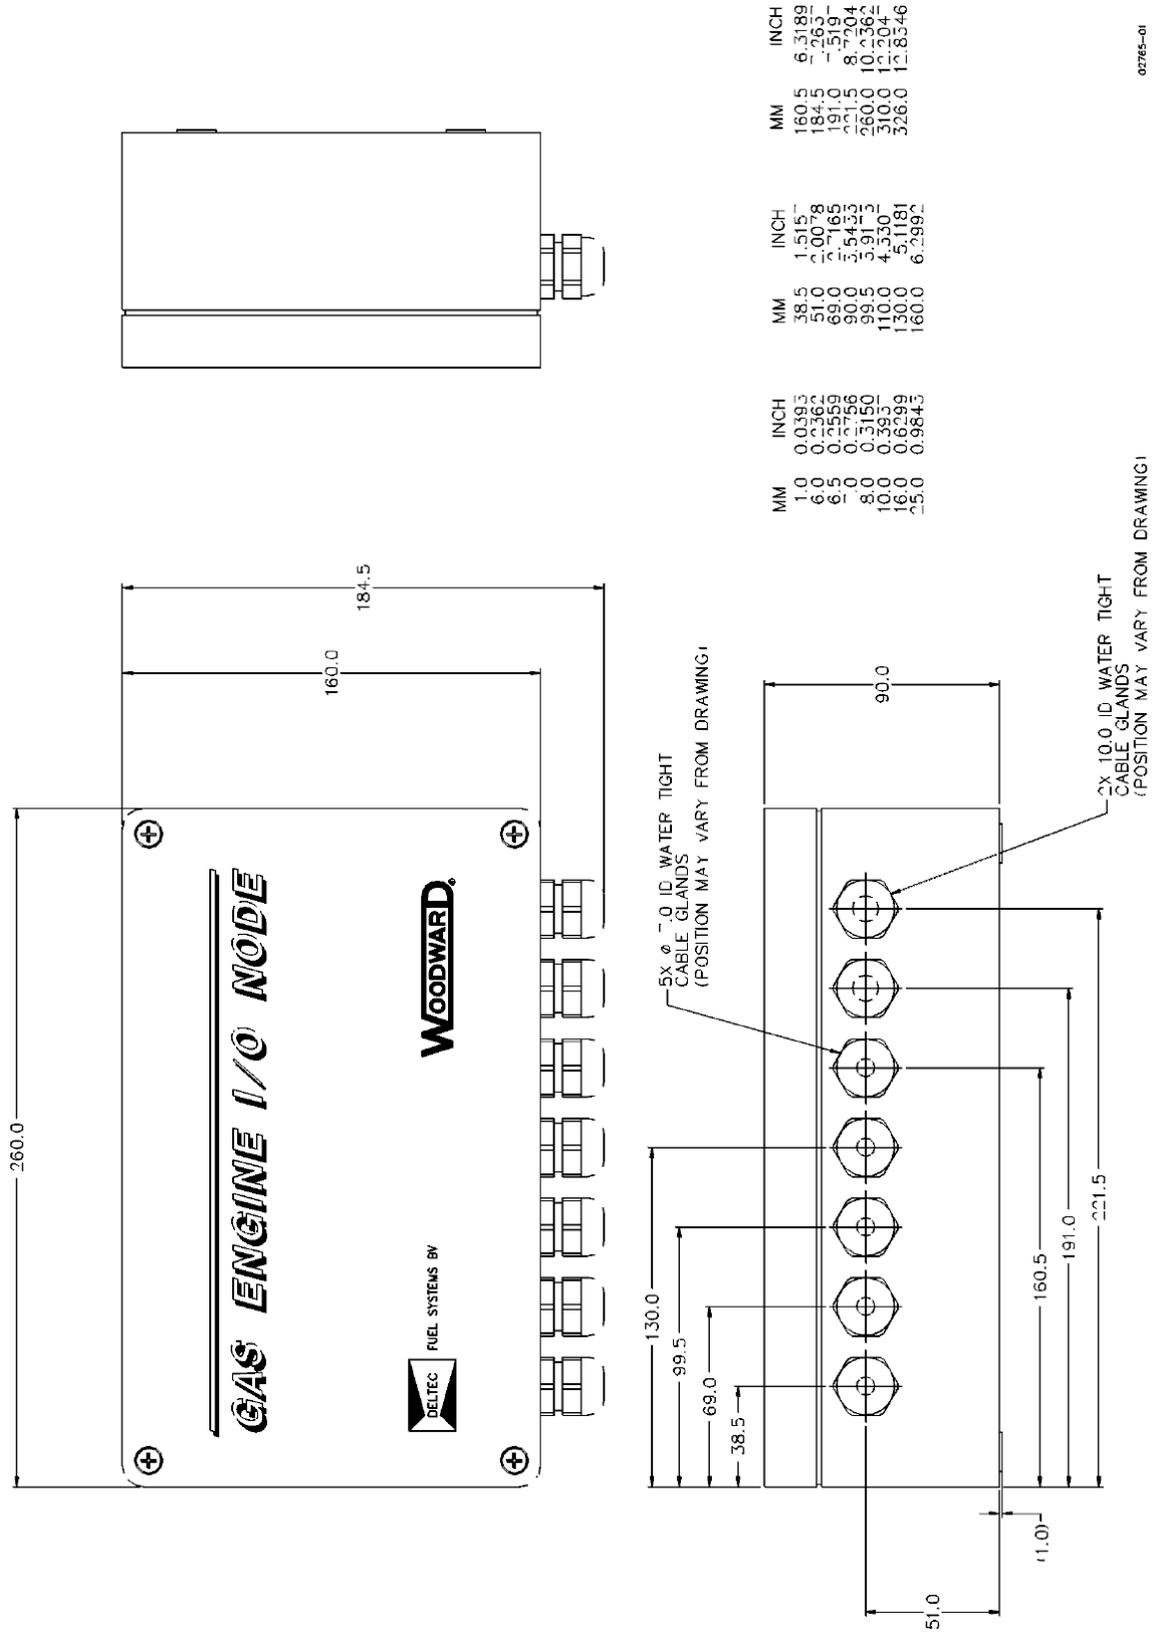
Outline Drawing of the Gas Engine I/O Node
